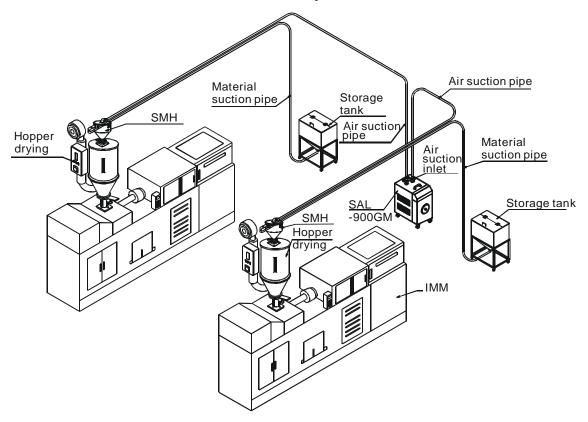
installation layout 2 (SAL-900G/900G2)
